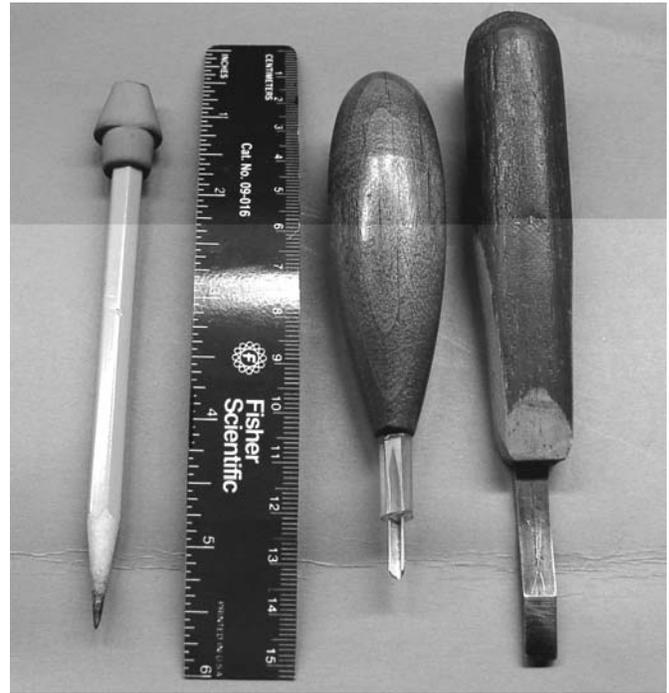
The tools needed for forming moldings are few and inexpensive. The only tool you might add would be a pocketknife with a blade custom-ground to get into tight crevices. Note the Tygon tubing on the veiner to protect the fingers from its edges
